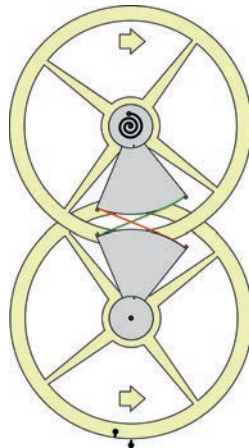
Linked circular balances and single spiral spring arrangement of H3
